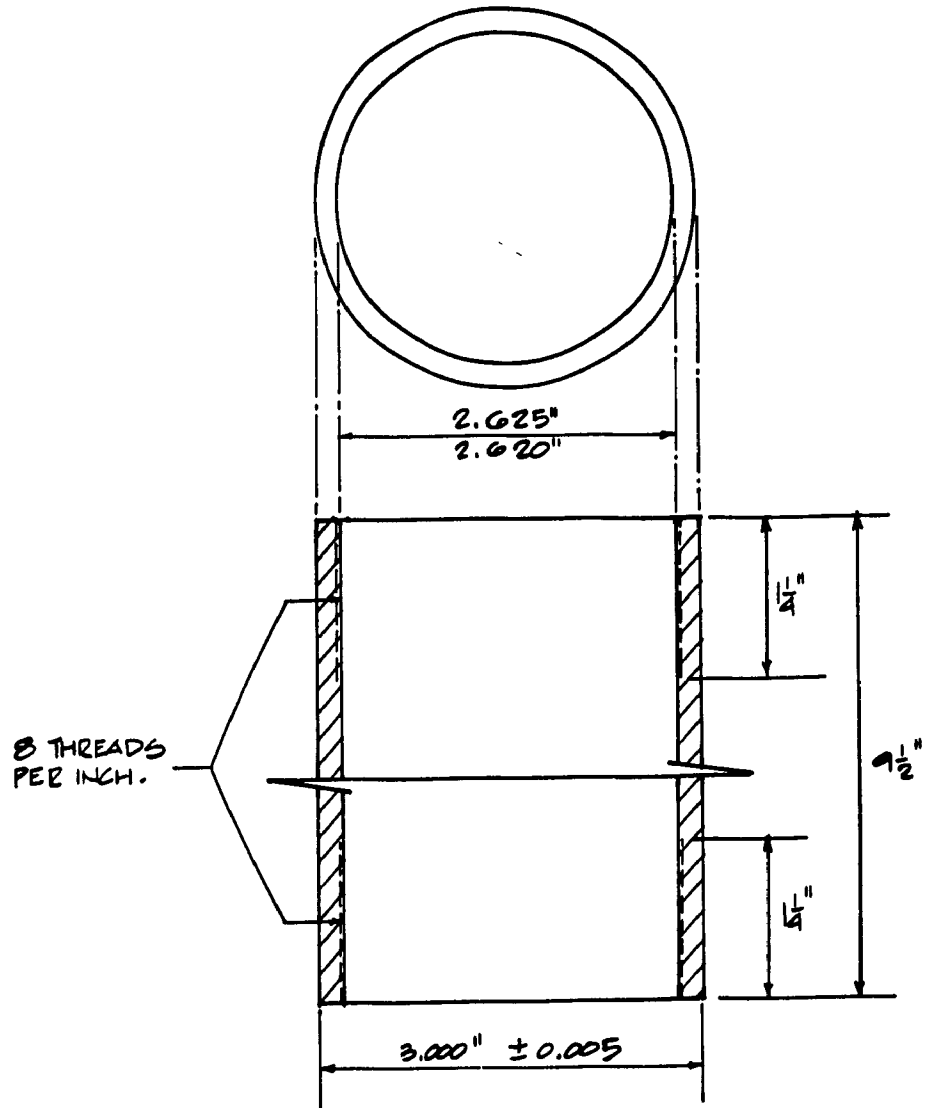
Steel Pipe Section (Parts No. 5, 6, 7, 9; Fig. A 4.7)
